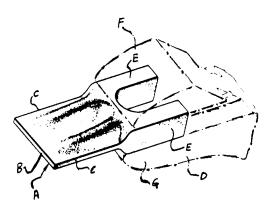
A - Bucket; B - Digging edge; C - Digging teeth; D - Connecting lug; E - Tooth base portion; F - Reversible digging edge
